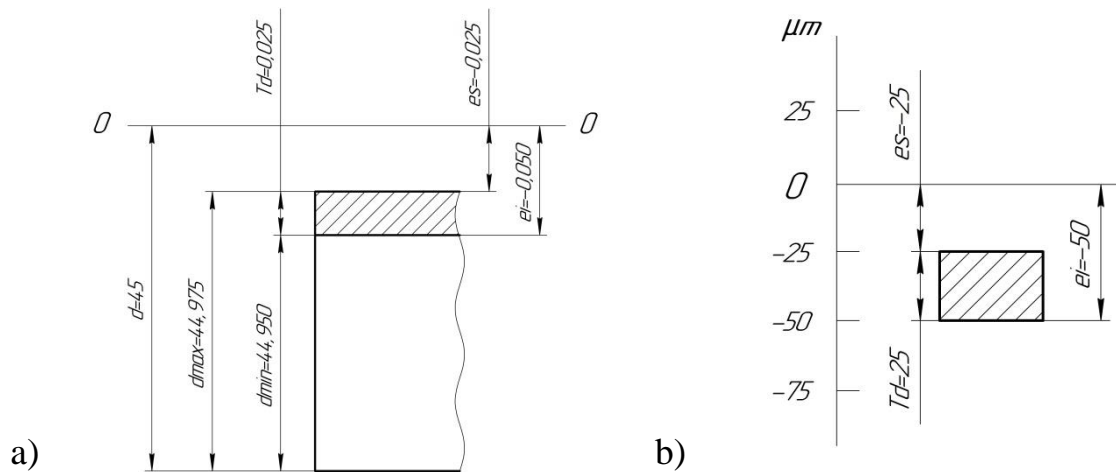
Is a layout of the tolerance limits of the hole and shaft
